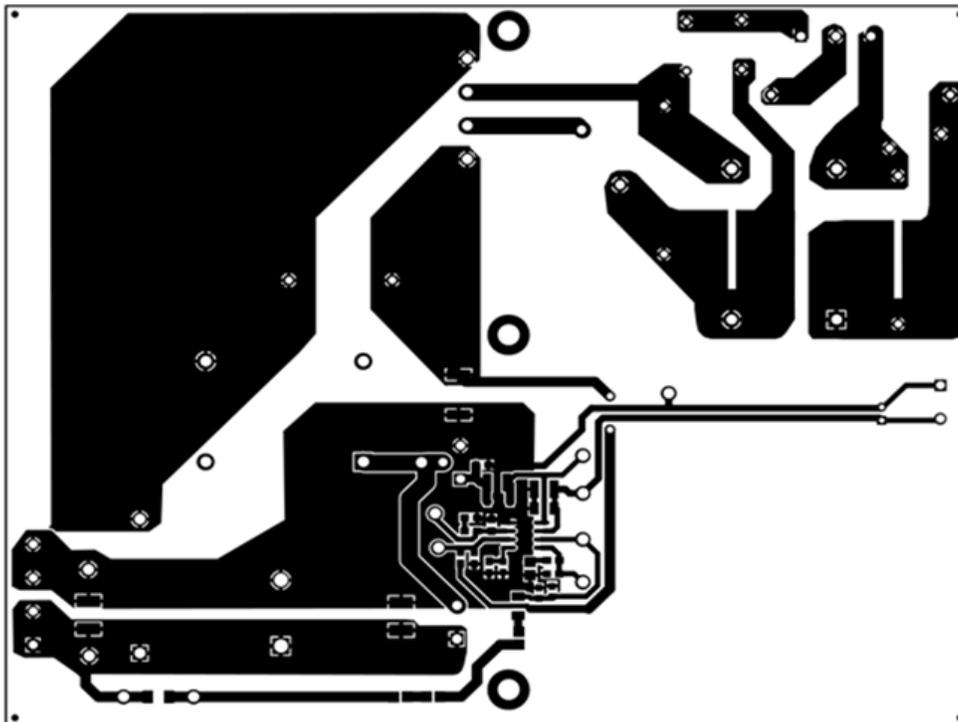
UCC28180EVM-573 Bottom Copper (bottom view)
